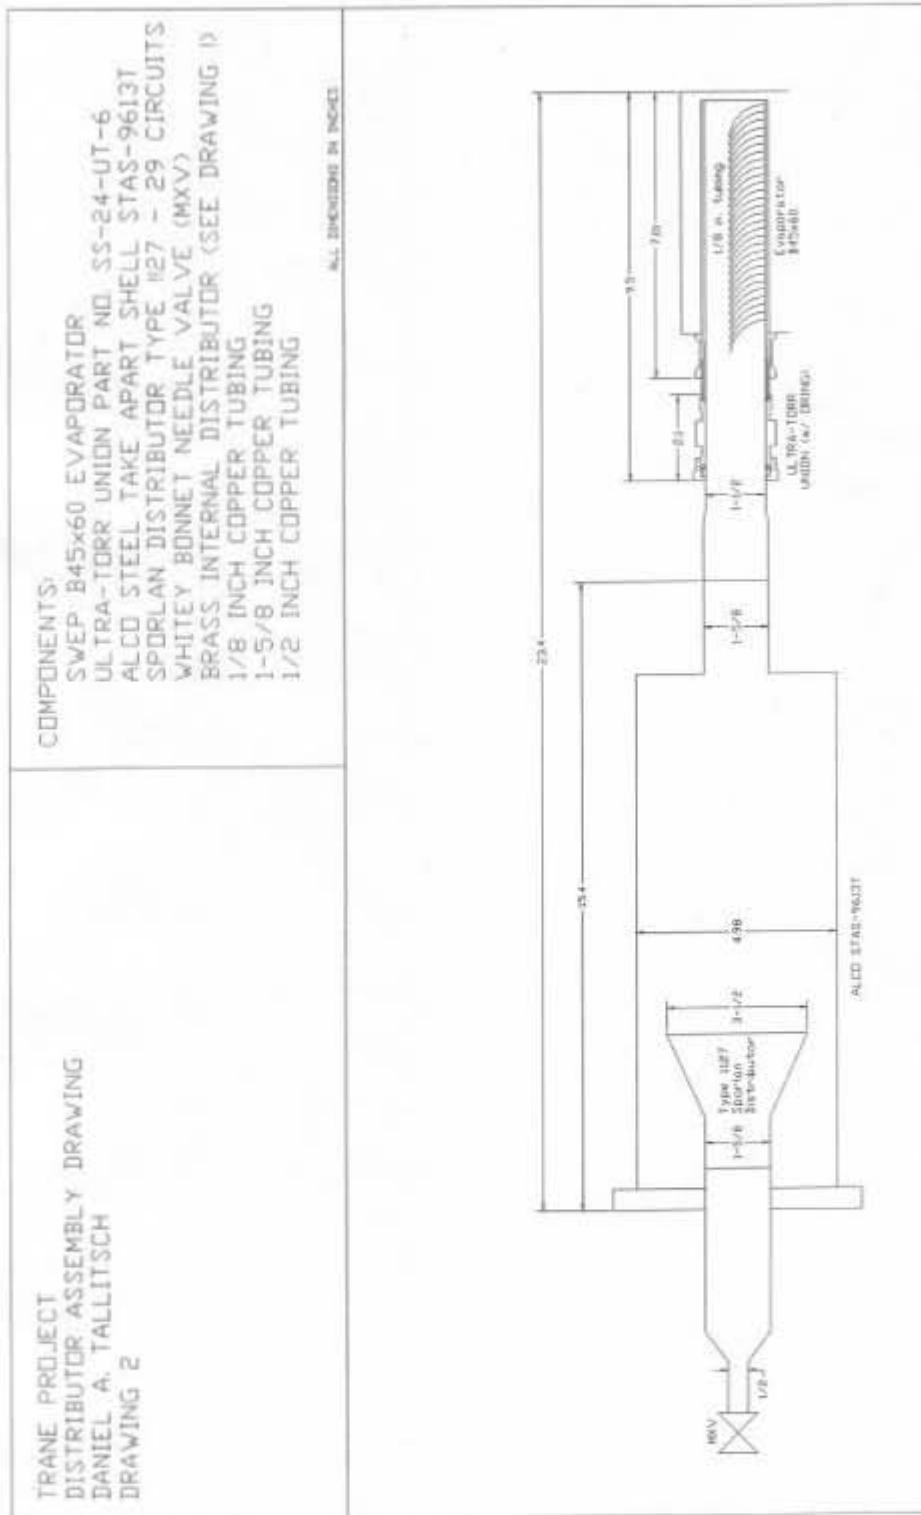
Assembly drawing of custom refrigerant distributor.
